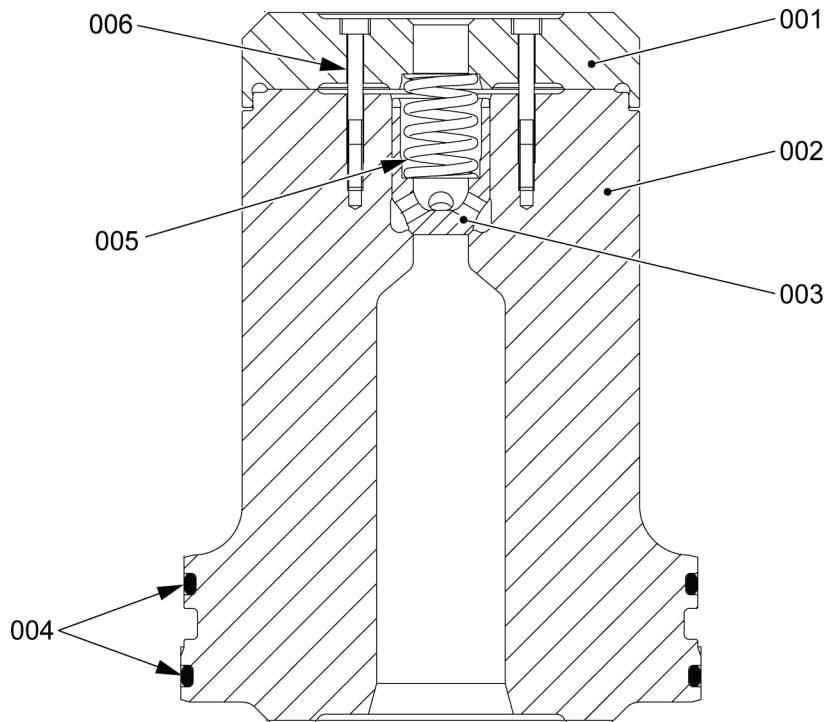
Fuel pump (X4) - Pump cylinder assemble
